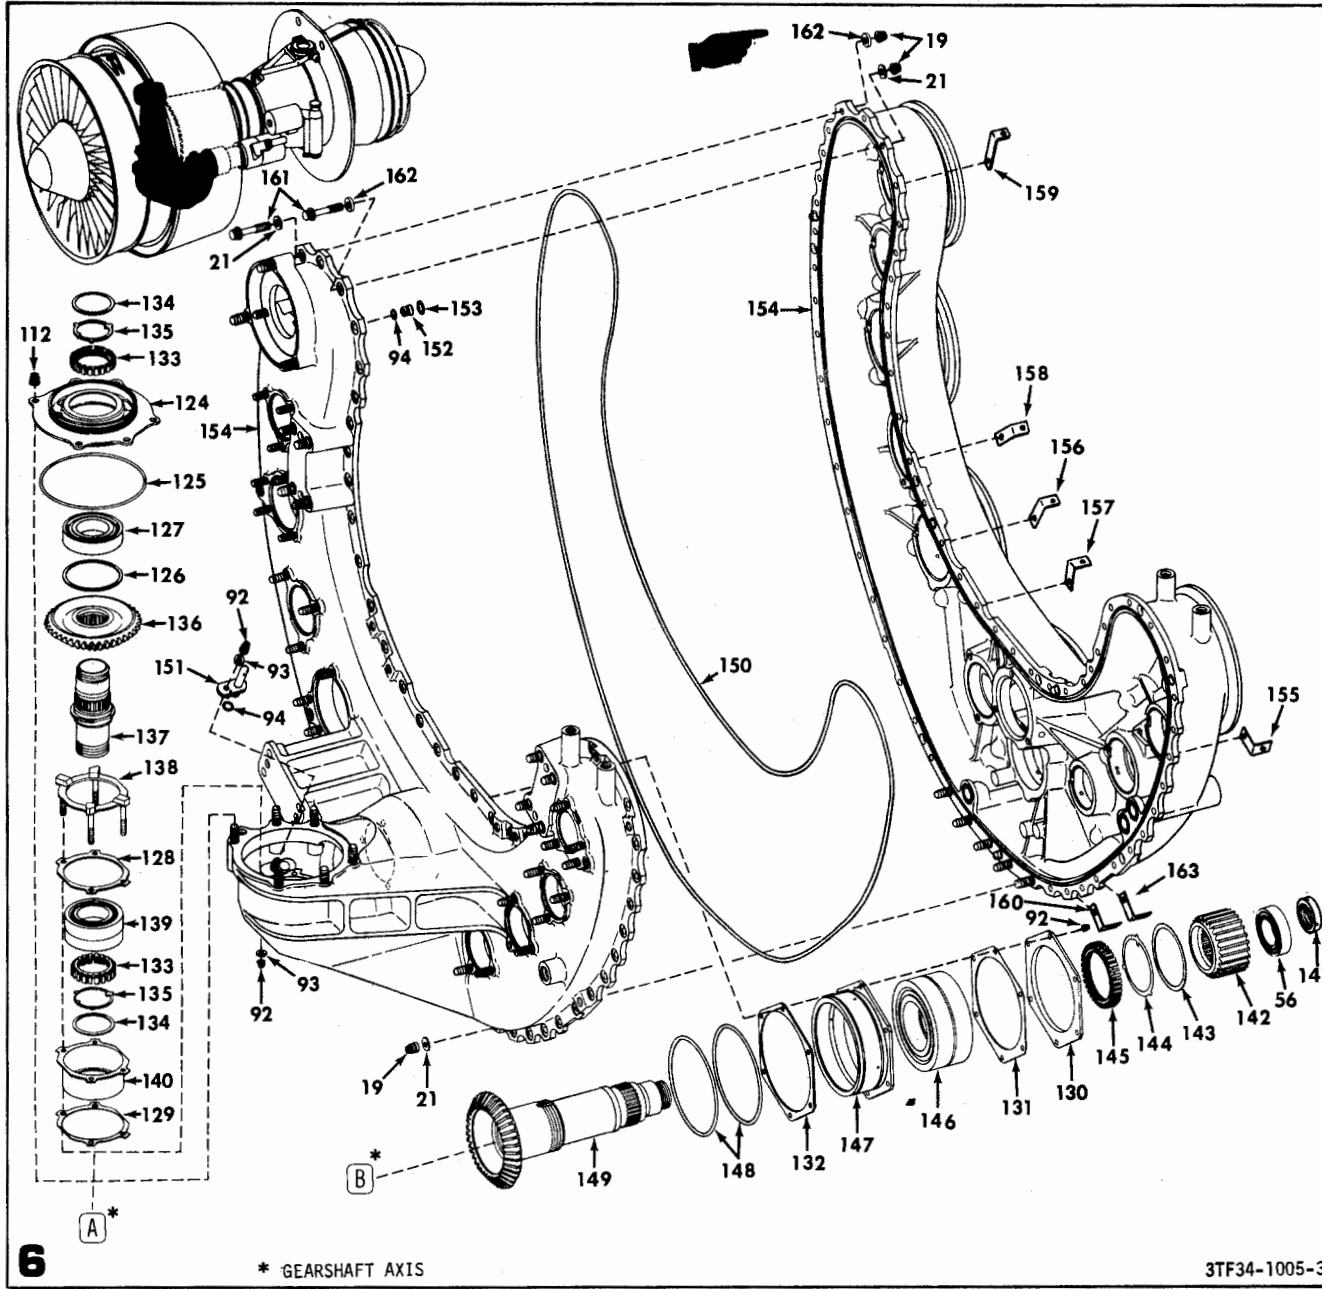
ACCESSORY DRIVE GEARBOX
